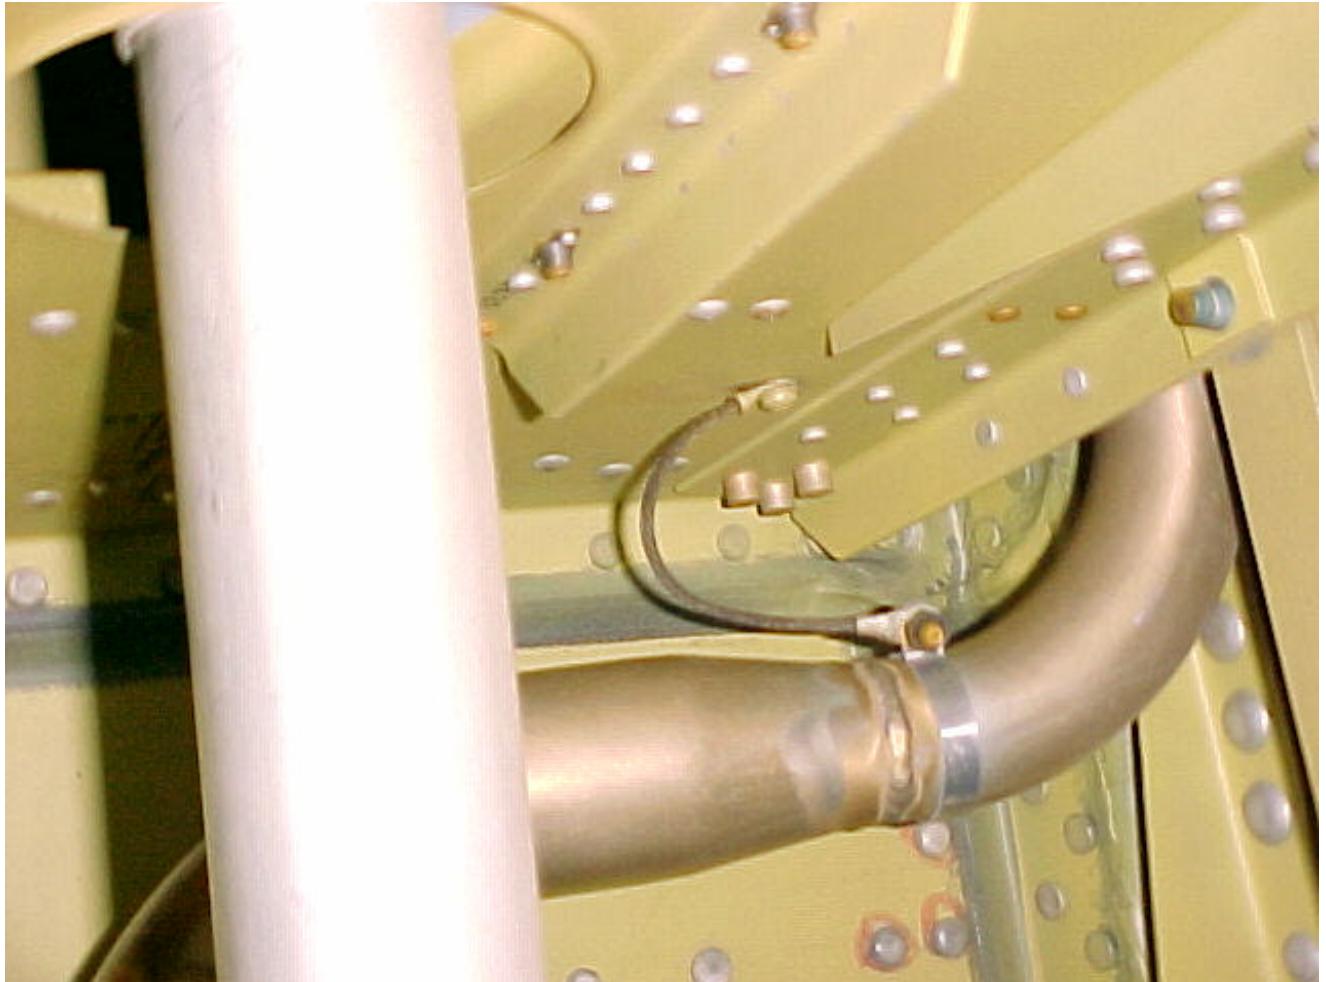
Photograph of inspection area for the rear spar upper chord, vertical flange at WS 293. A DVI and HFEC are both conducted to examine for cracking.
